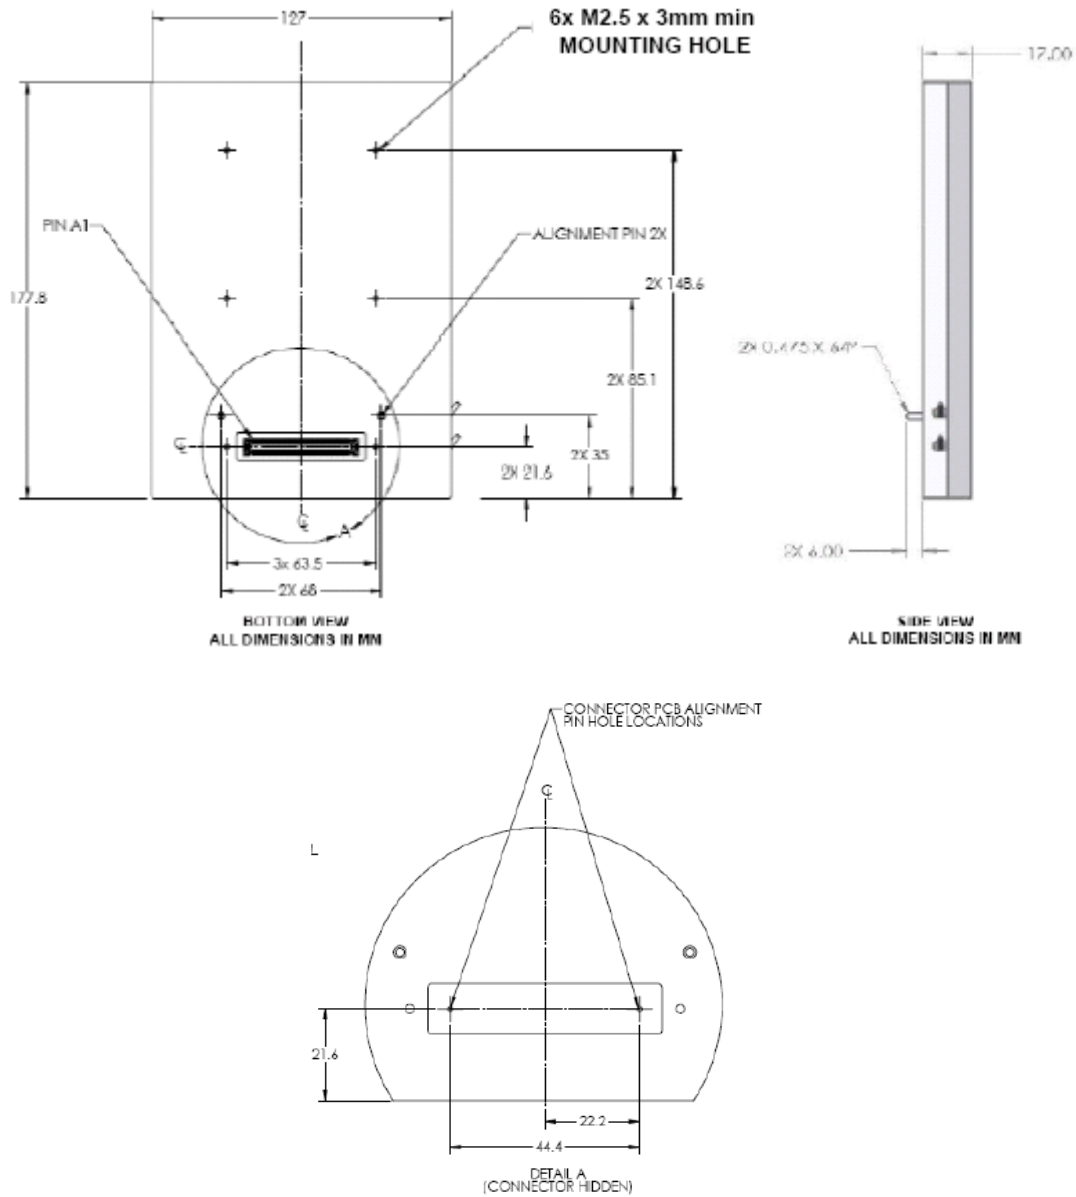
MSA-100GLH Flattop mechanical dimensions - bottom/side views
